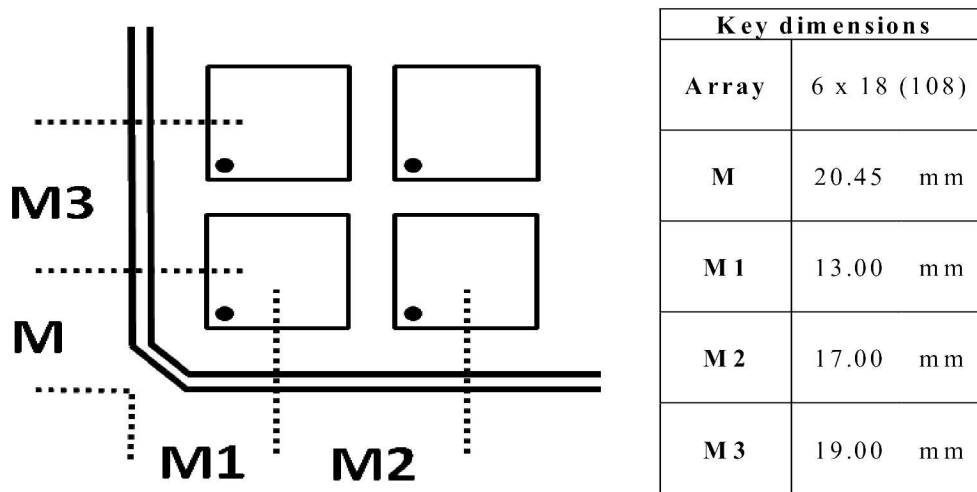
Matrix-tray key attributes and dimensions (for LPDDR5 package)
